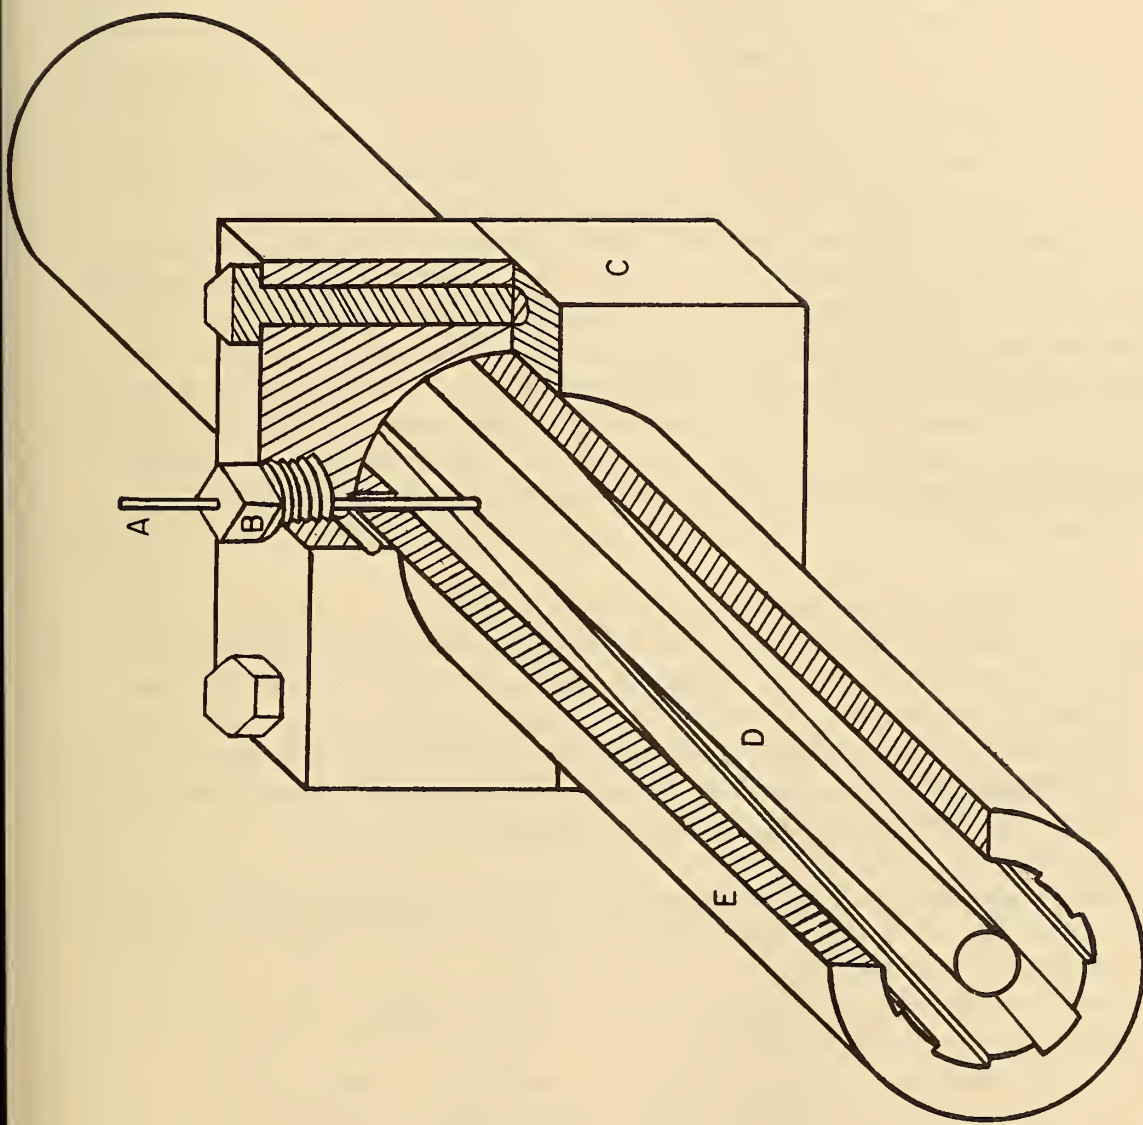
A cutaway view of the assembled fixture for plating the gas port of 20 mm barrels. A - Gas port anode (Pb-plated steel) (shaded area is insulated); B - Anode height adjustment screw; C - Anode supporting jig (lucite); D - Barrel anode; E - Barrel.
